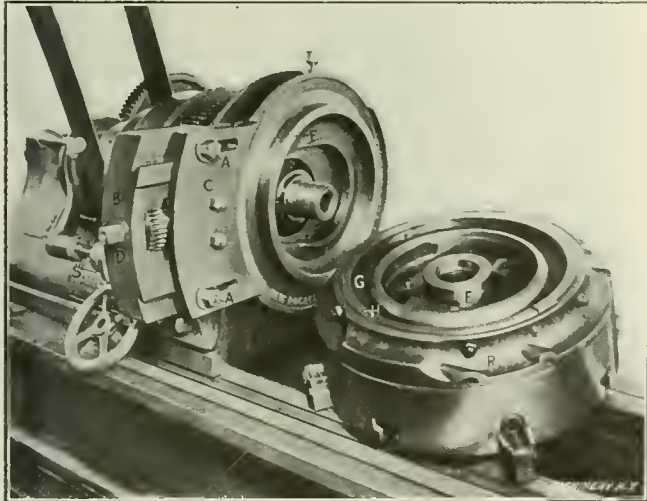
View showing Chuck removed and Adjustable Slide for Varying the Ellipses
